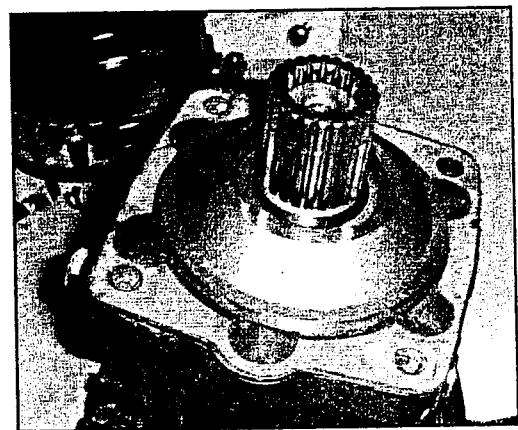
Showing loose bolt on drive assembly to luffing winch frame.
